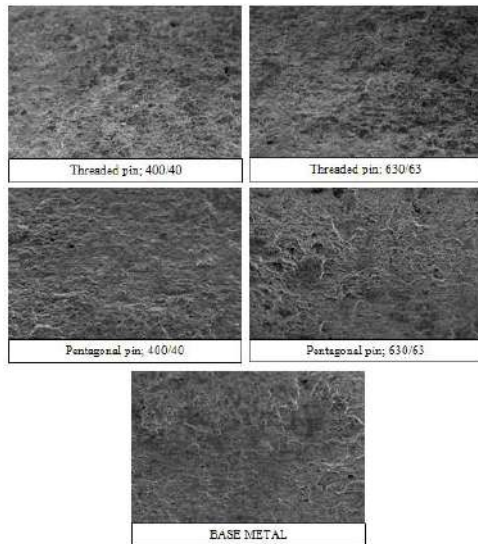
SEM micrographs of fractured surface for some welding conditions and base metal
